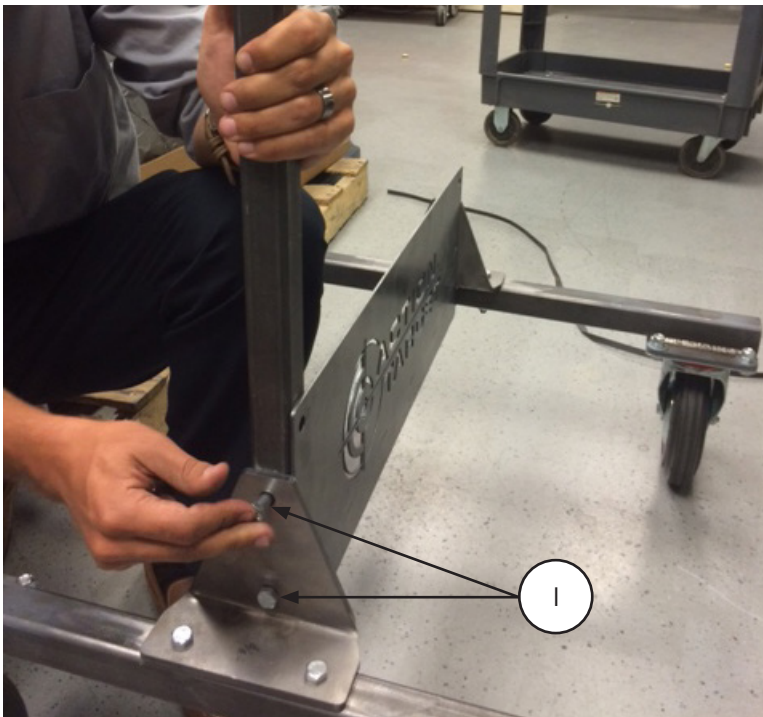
INSTALL CARRIAGE BOLTS INTO TRAP STAND UPRIGHT
